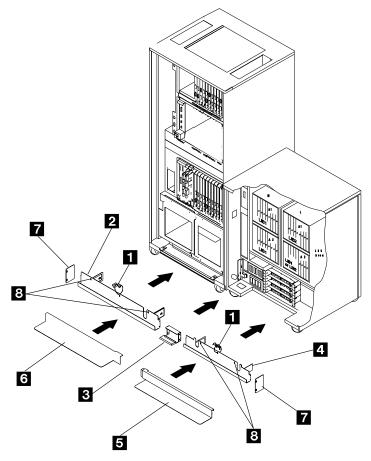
3746-900 and 3745 17A Ground Brackets (Rear View)
